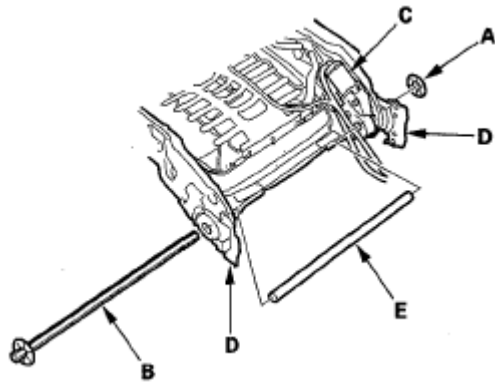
Identifying Push Nut, Connecting Rod, Recline Motor And Recline Adjusters
